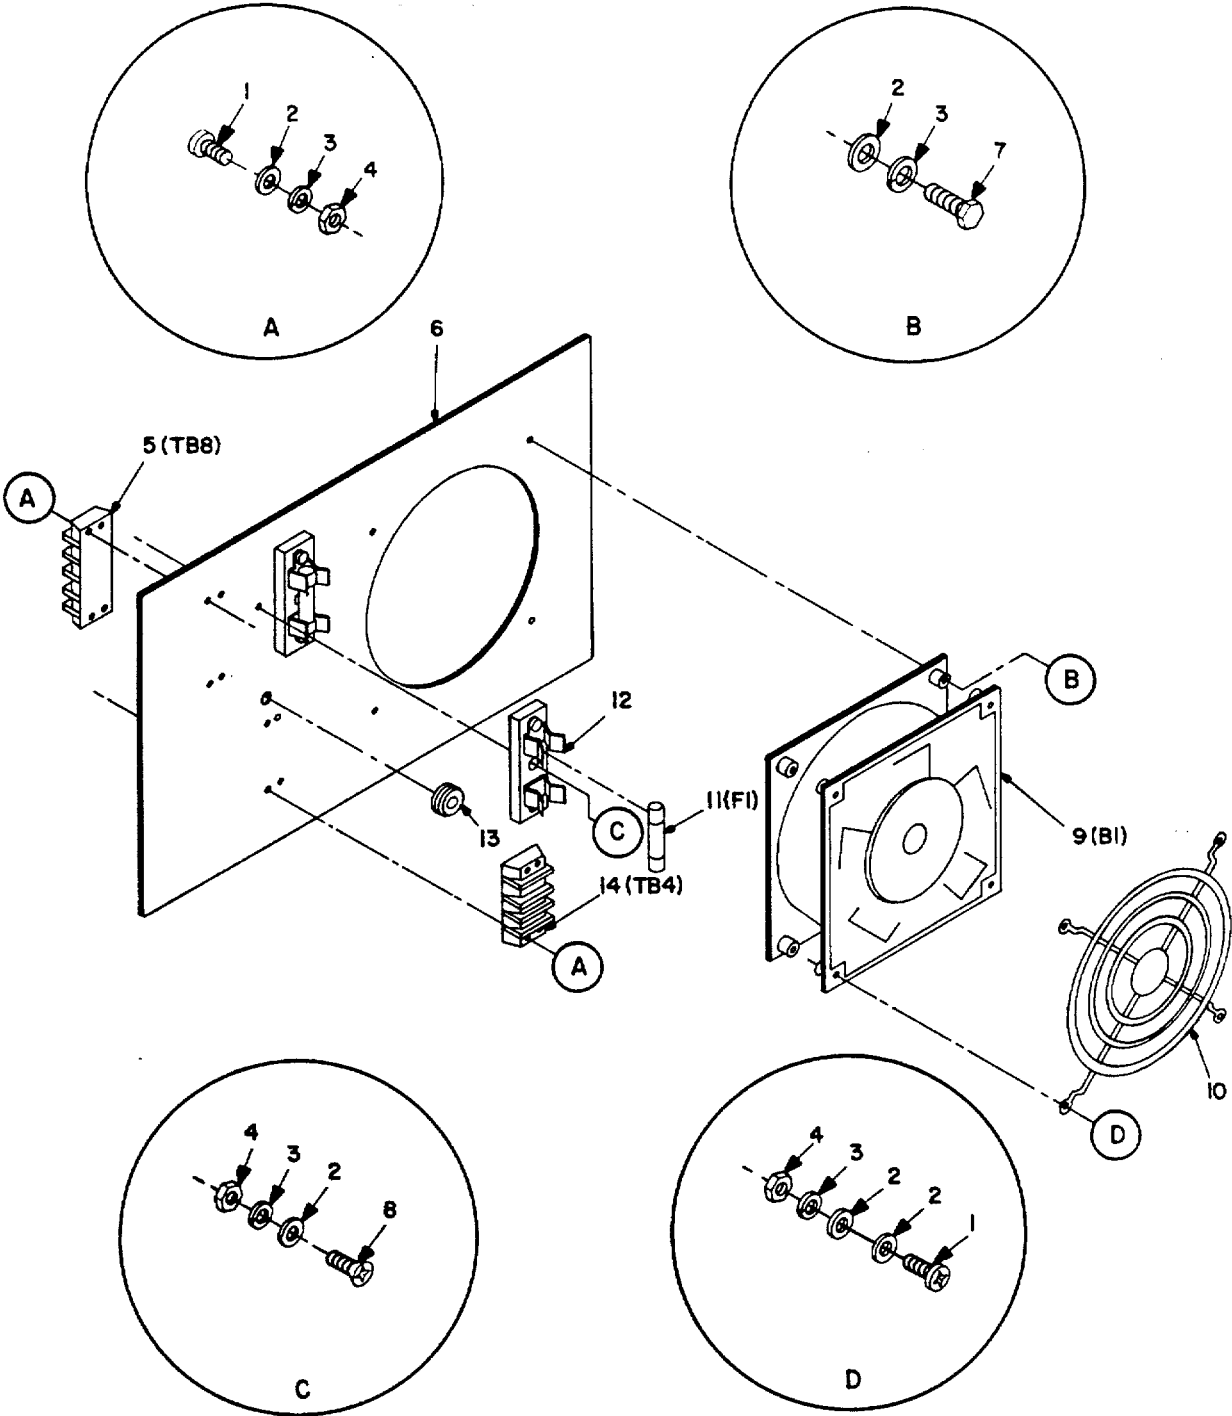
Capacitor panel assembly, SM-D-836500-2 (Sheet 2 of 2).
